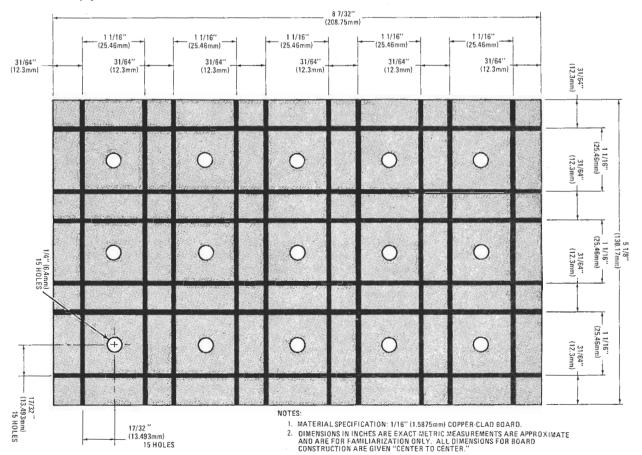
PRINTED CIRCUIT LAYOUT for the Electronic Slot Machine, shown half size.
